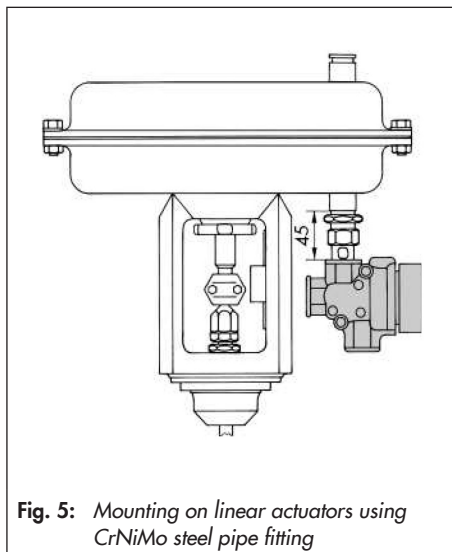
Mounting on linear actuators using CrNiMo steel pipe fitting
